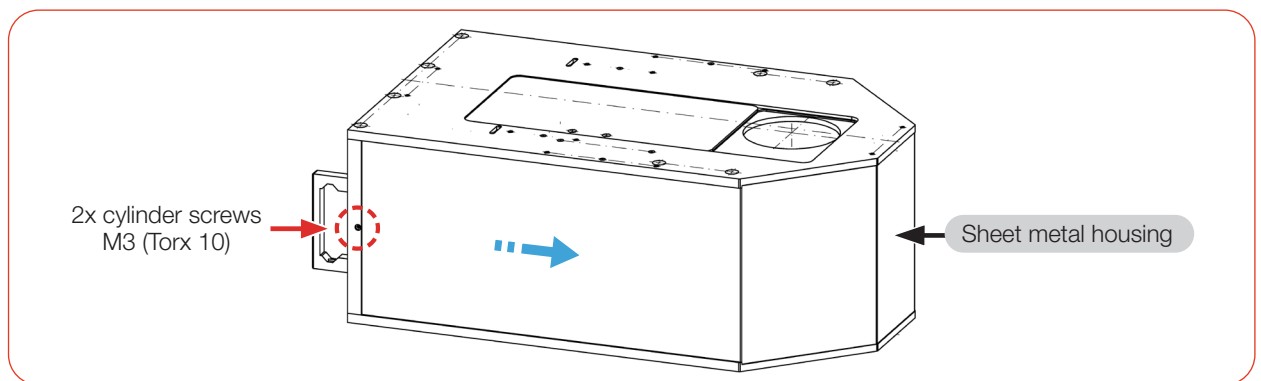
Removing the sheet metal housing on the PM 100 and PM HP75/150
